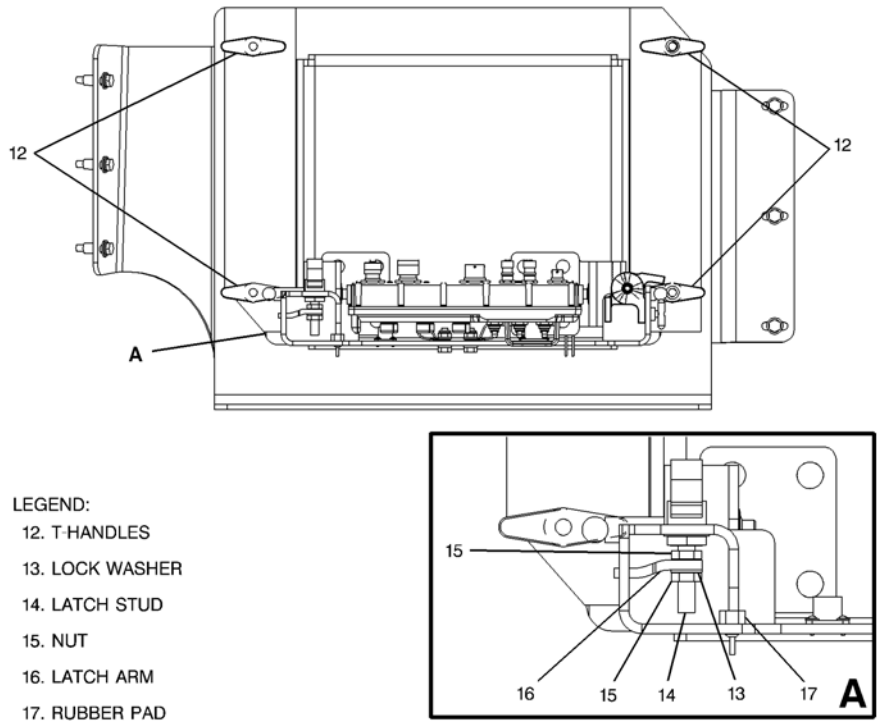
DCM Installation for TOW HMMWV (Roof Mount, Sheet 3 of 3)
